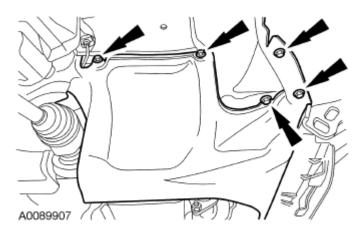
Locating RH Splash Shield Bolts Courtesy of FORD MOTOR CO.
